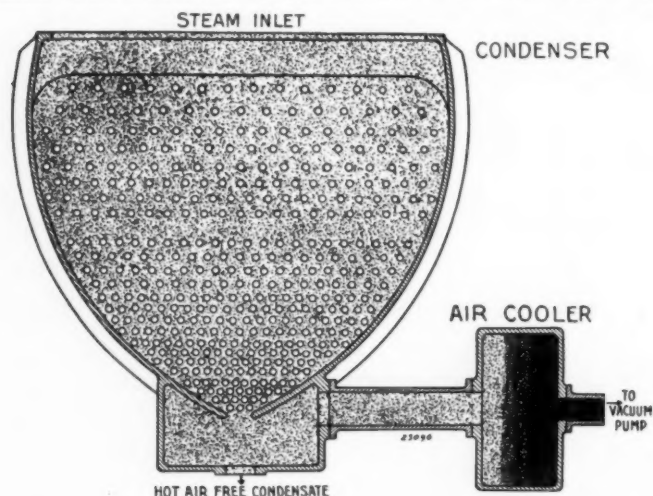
ARRANGEMENT OF TUBES, SHELL SHAPE, HOTWELL, VAPOR OUTLET, AND AIR COOLER IN AN INGERSOLL-RAND CONDENSER
